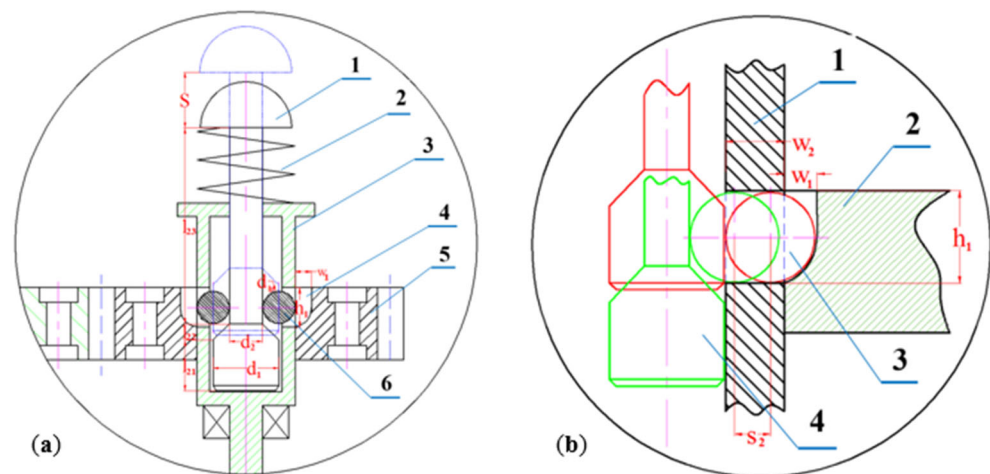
(a) Schematic view of the ball shifting mechanism; 1—Pushing rod; 2—Spring; 3—Housing shaft; 4—Ball socket; 5—Planet gear; 6—Ball. (b) Schematic view of the ball motion; 1—Housing shaft; 2—Planet gear; 3—Ball; 4—Pushing rod.
